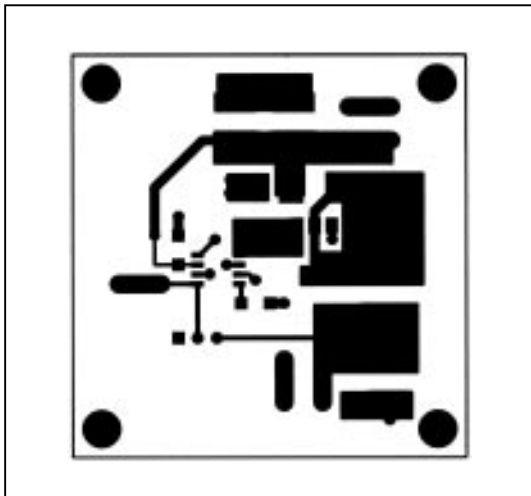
MAX608 EV Kit PC Board Layout—Component Side
